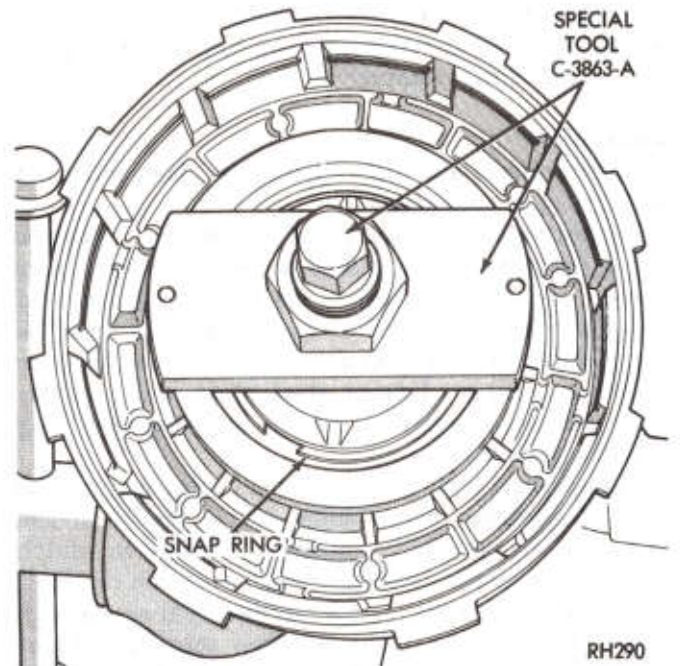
Front Clutch Spring Retainer Snap Ring (A-727)
